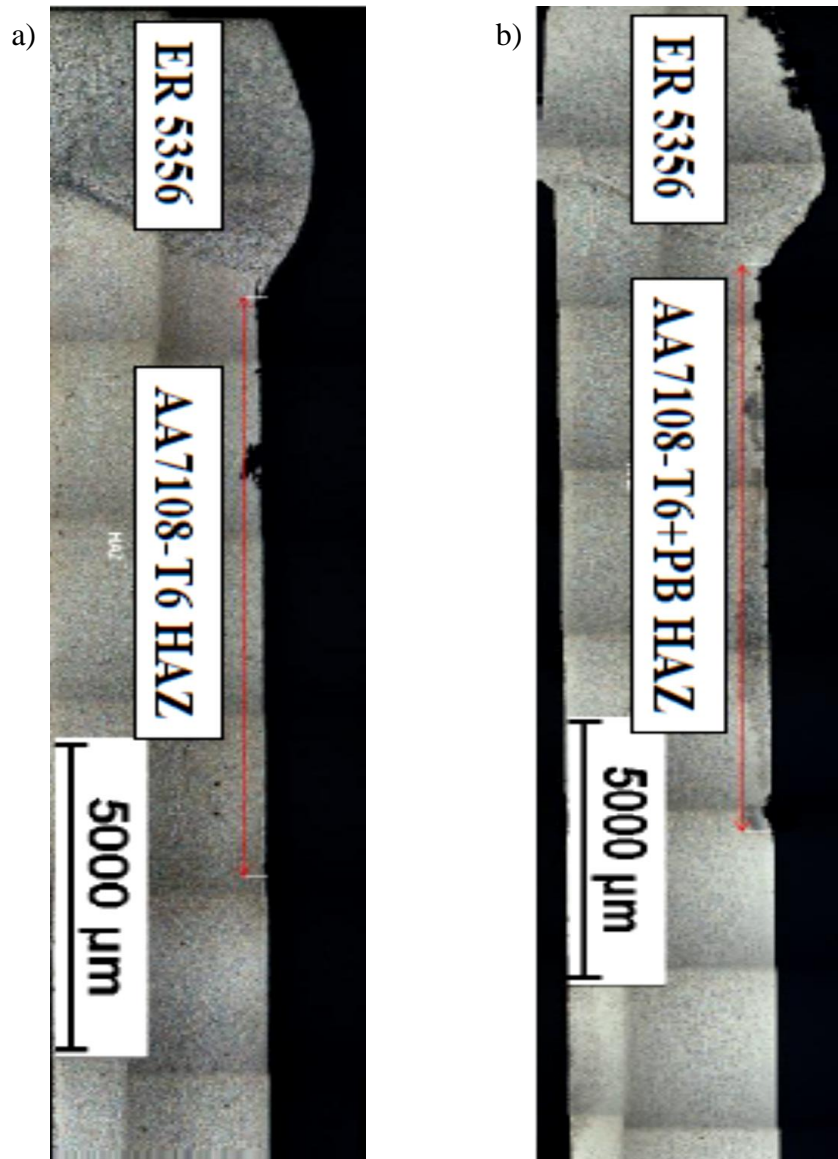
Large area scans of lap-joint welded configuration I (ER5356/AA7108/≡) in the (a) as-welded T6 condition and the (b) as-welded T6+PB condition post exposure to ASTM G85-A2.
